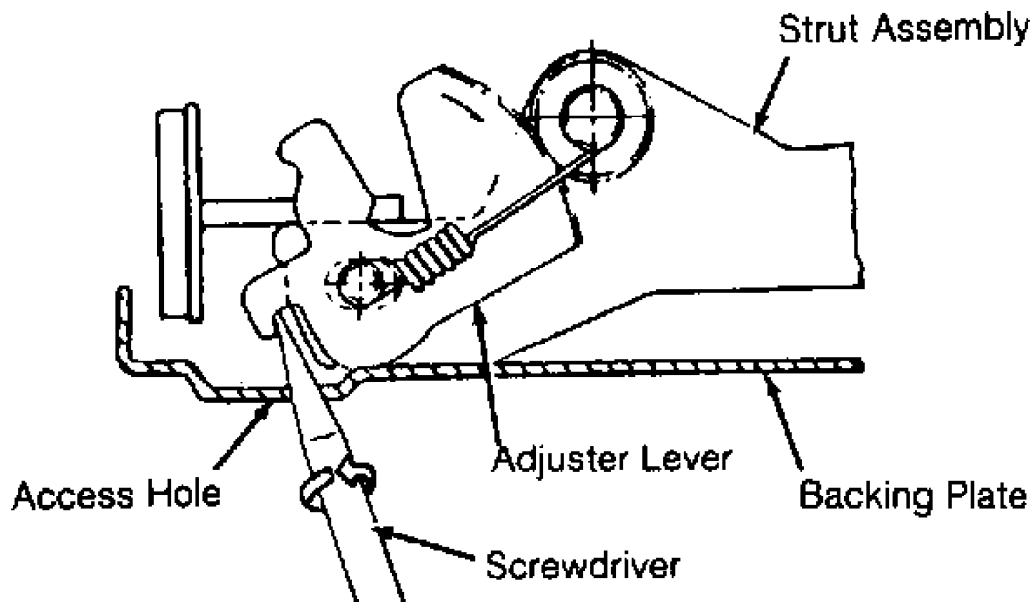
Resetting Brake Shoe Strut Assembly Adjuster Lever (Justy)
